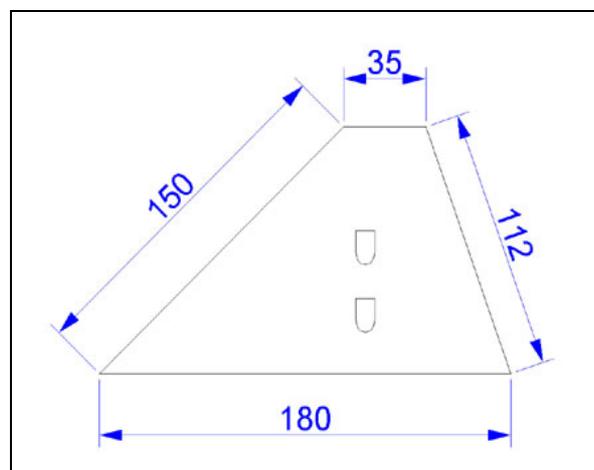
Technical Drawings of One unit Windrose in unfolded state
